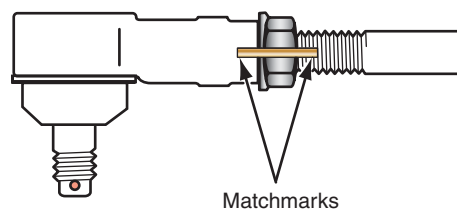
Marking outer tie-rod ends, jam nuts, and tie-rods prior to outer tie-rod end removal.
